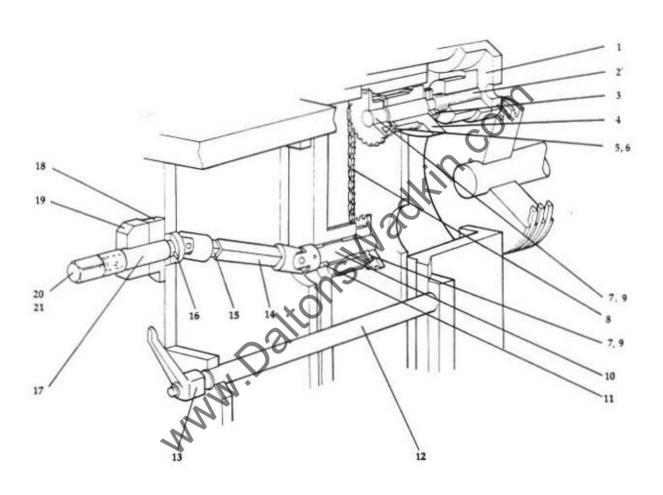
BOTTOM (EXCLUDING FIRST) AND TOP HEAD AXIAL ADJUSTMENT
